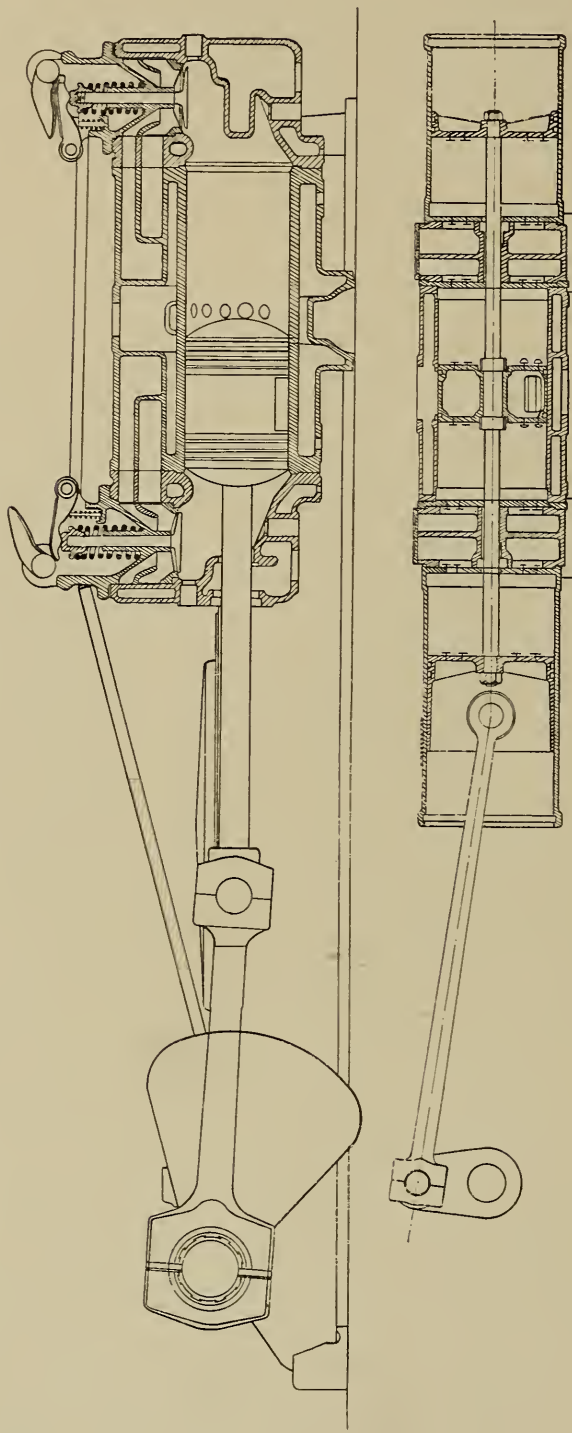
Longitudinal Section of Two-Cycle Engine (Koerting)—by Mather and Platt. Power cylinder shown above. Gas and Air pump below. Note inlet valves at each end and length of piston in power cylinder.
